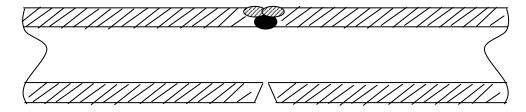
BEVELED PIPE WELD PIPE BEVELED FOR WELDING
